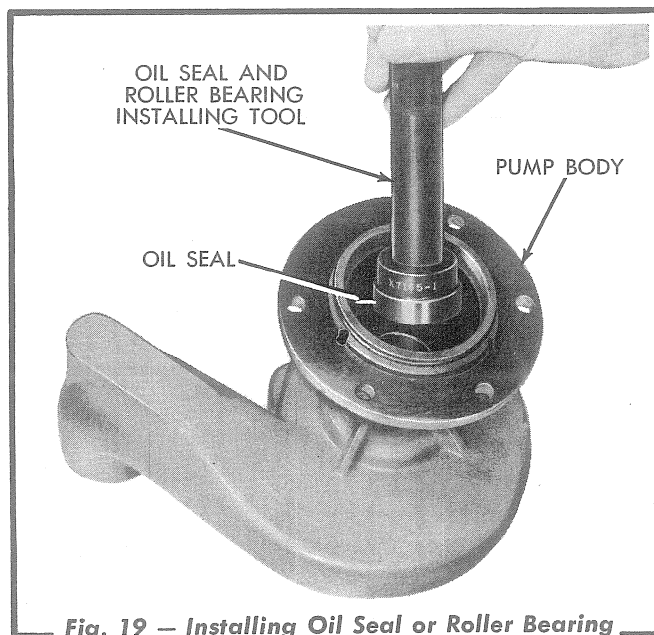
Installing Oil Seal or Roller Bearing in Second Type Water Pump
